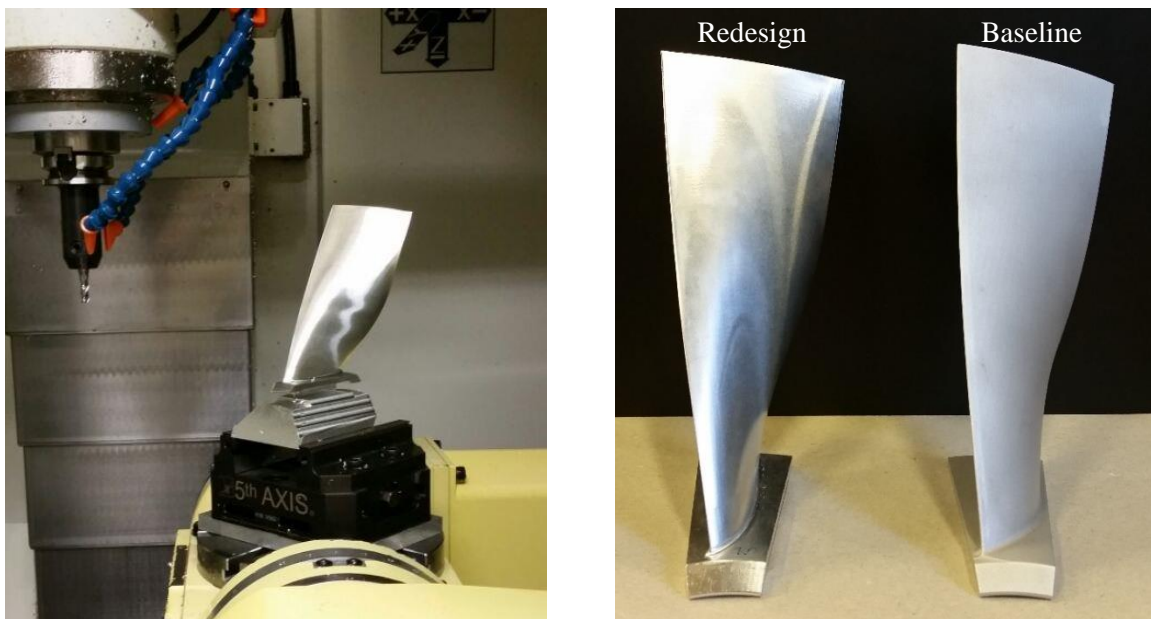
Redesign blade manufacture in the 5-axis machine (left), and redesign and baseline blades (right)
